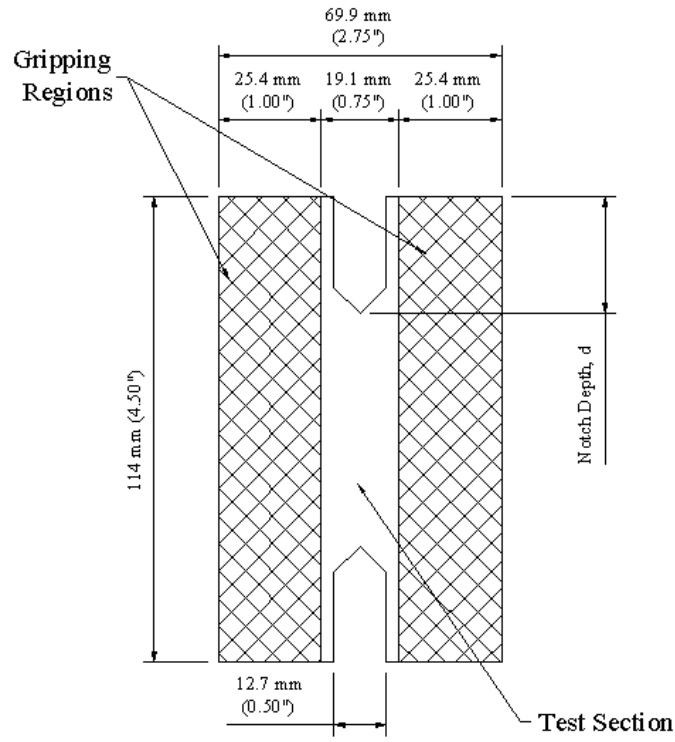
V-NOTCHED SPECIMEN DIMENSIONS
